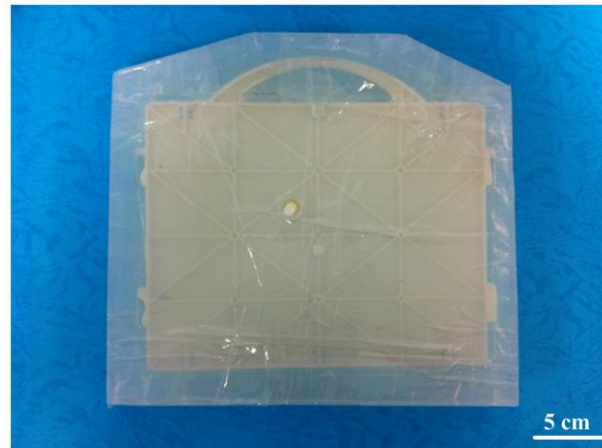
Silicone rubber mold of the modeling platform with ABS materials using vacuum casting
